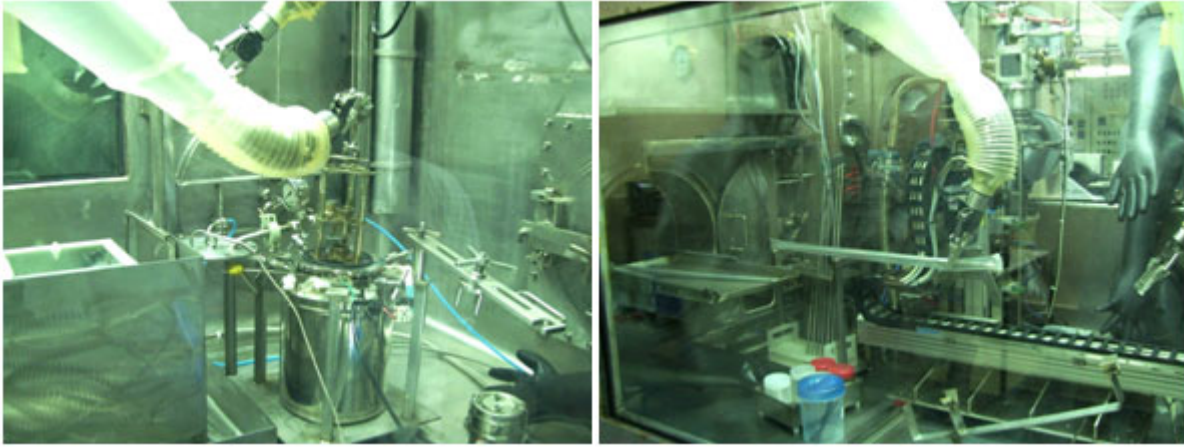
Glove box for microsphere handling and fuel pin welding operations.
